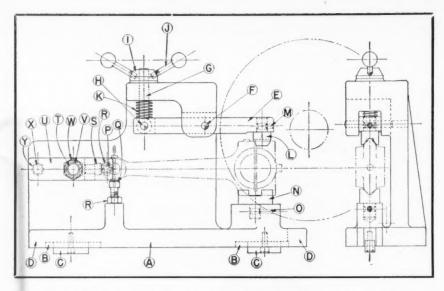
Views showing various details of a fixture designed to be used when straddle milling the faces at the large end of the connecting rod shown in Fig. 1
